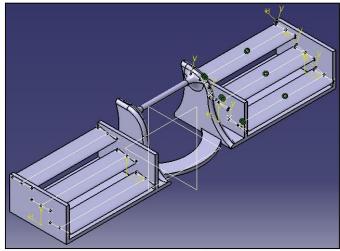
Assembly – Negative (-15°) Angle of Attack
